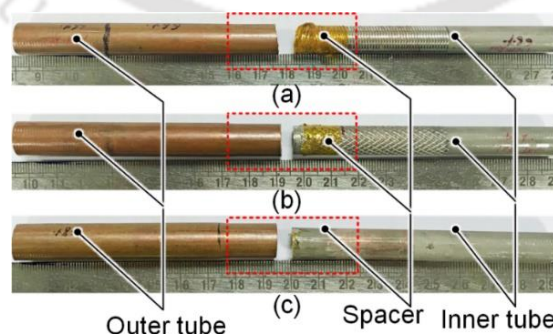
Separation failure (Joint failure) in (a) threaded, (b) knurled and (c) smooth-surfaced sample
